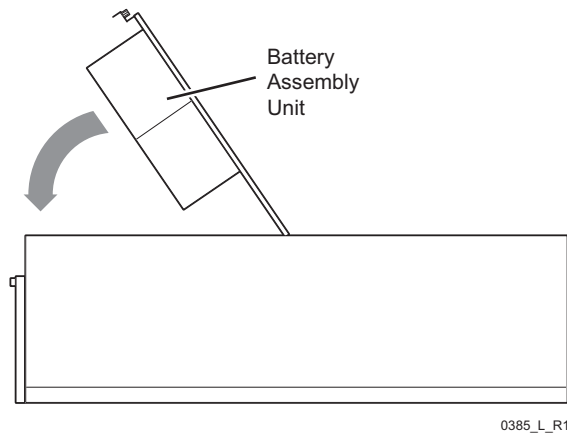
Flip the Battery Assembly Into the Power Supply.
